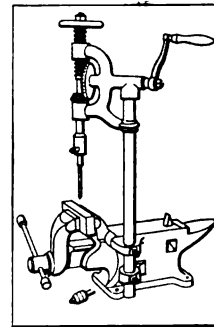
Drill press, vise and anvil mounted all in one, making a compact set of tools
